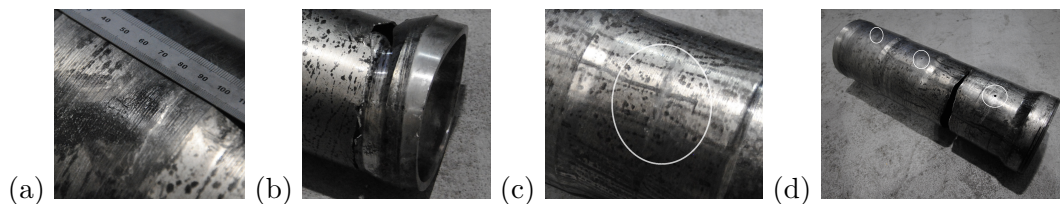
Results from forming parts with defects: (a) Saw cut with material which flowed over it during forming, (b) Circumferential crack instigated by a saw cut, (c) Surface roughness, a prelude to spontaneous fracture, (d) A part formed in two passes showing drilled defects (circled) and circumferential fracture which occurred spontaneously under high deformation.
